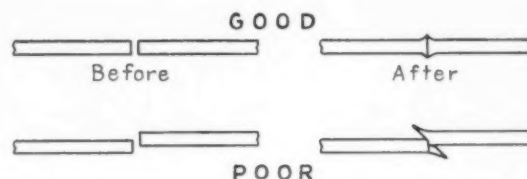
Sketch showing the effects of good and poor alignment on the finished flash weld.
